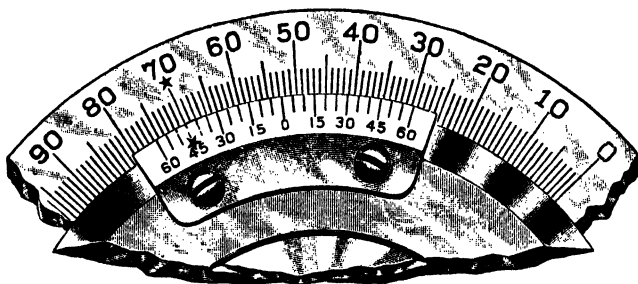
How to Read Universal Bevel Protractor with Vernier.
